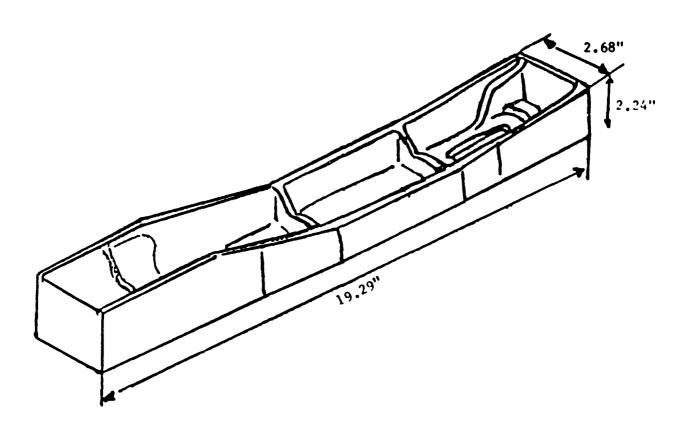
T6 Precision Die Forging Dimensions.
